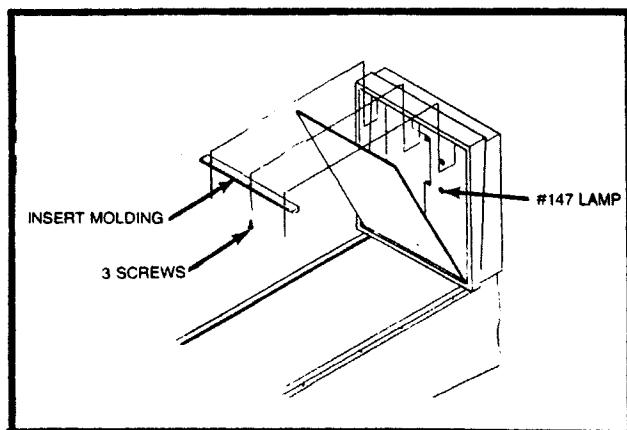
Display insert lamp replacement. Use a 147-type bulb.
